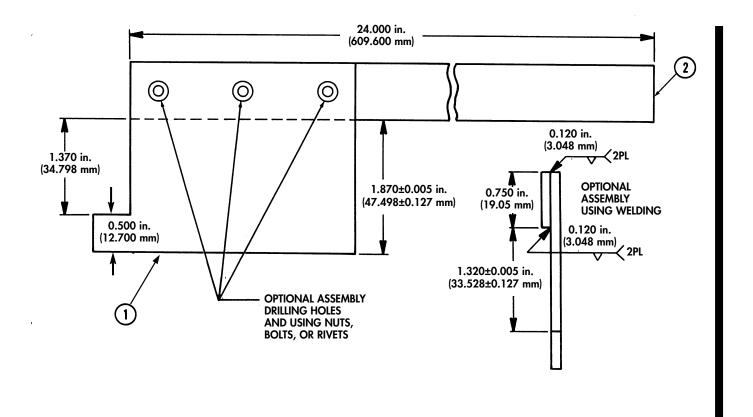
Pulley Alignment Tool Fabrication (Cont'd).
